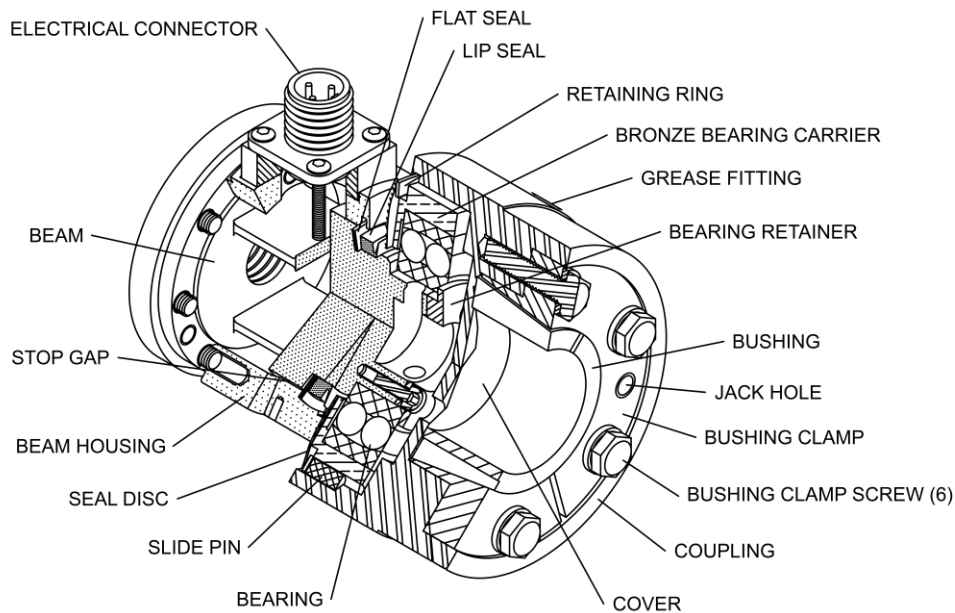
LIVE SHAFT VERSION CUT-AWAY VIEW
